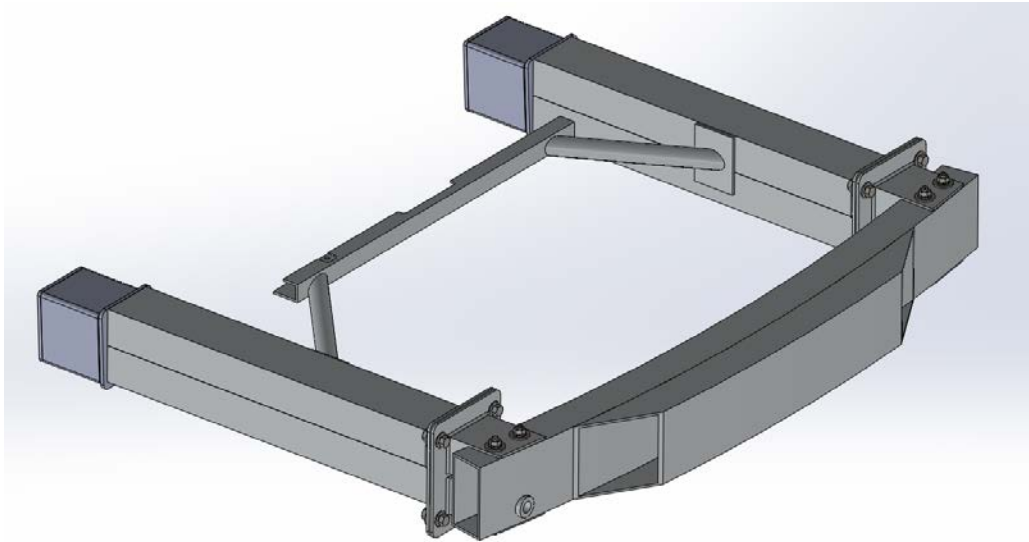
Subassembly of front crash structure with easily replaceable bumper assembly.
